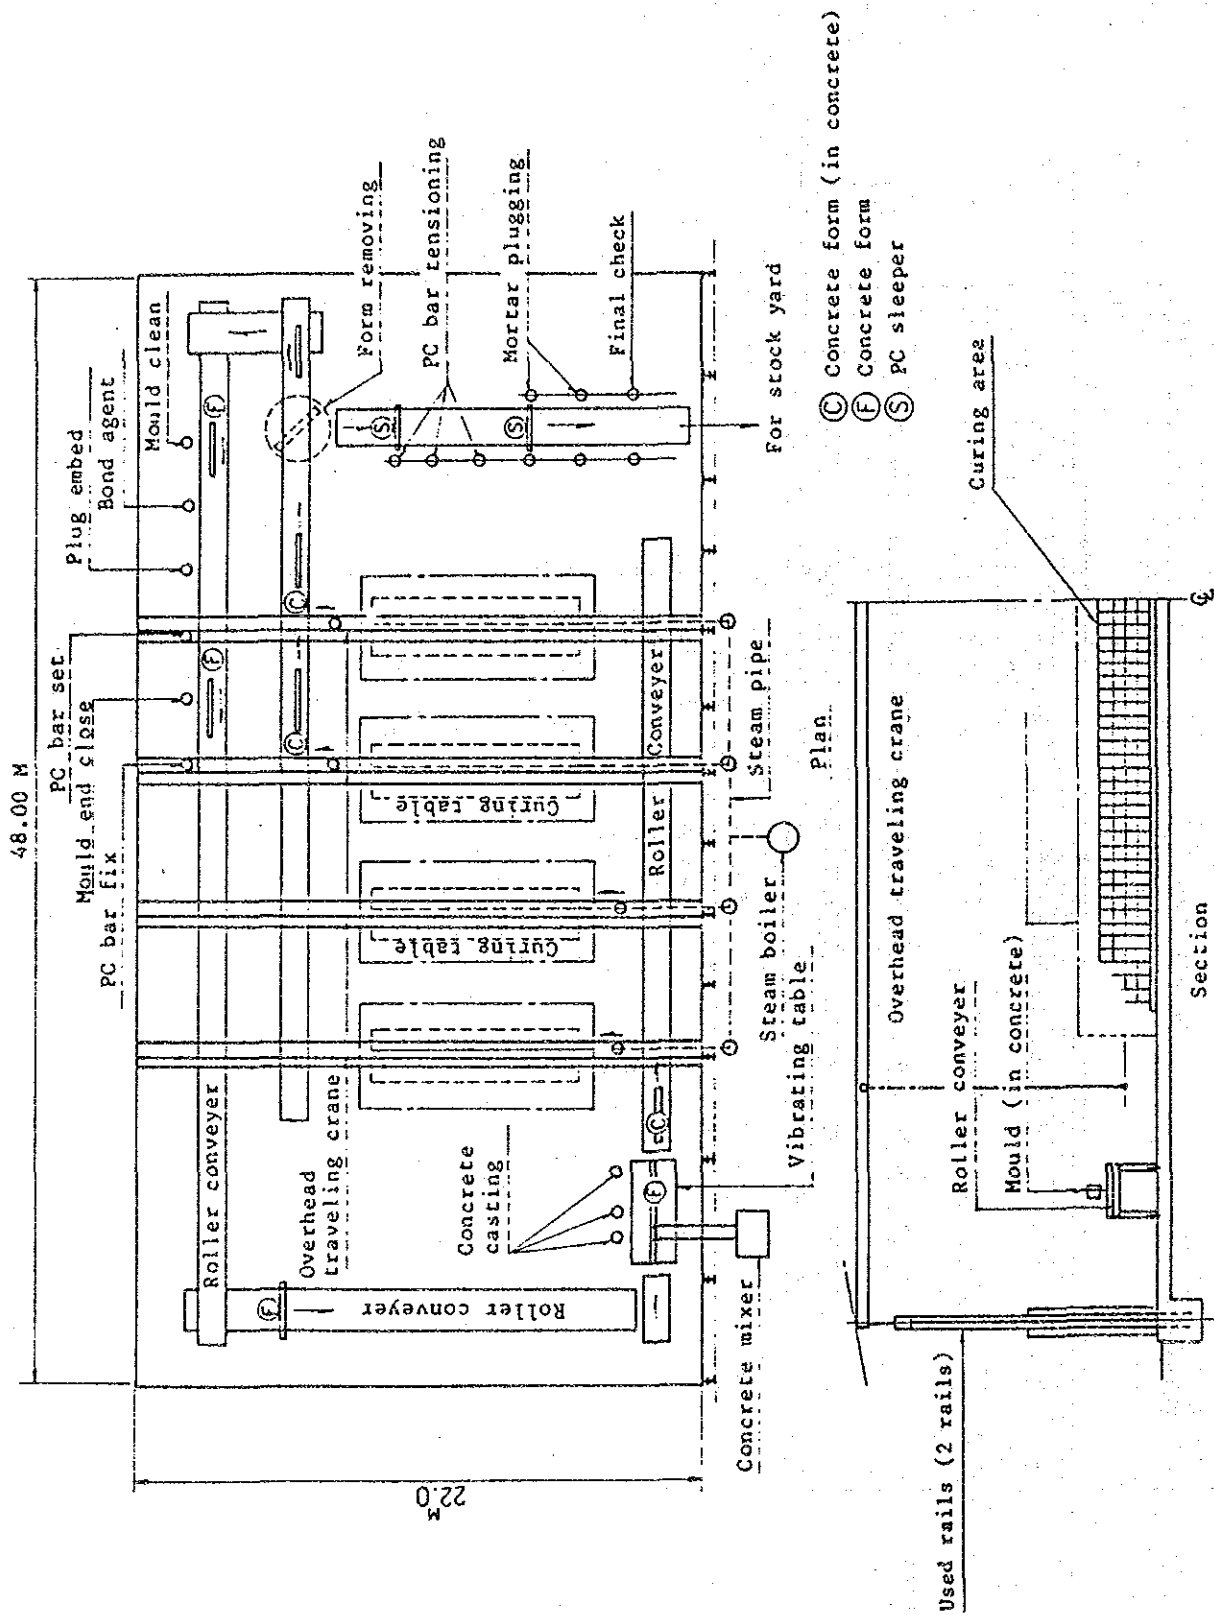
Typical PC Concrete Sleeper Factory (Post-tension) Layout
